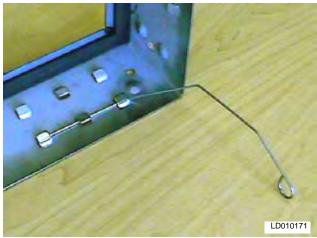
CORRECTLY INSTALLED LATCH P/N 315-004-003.
